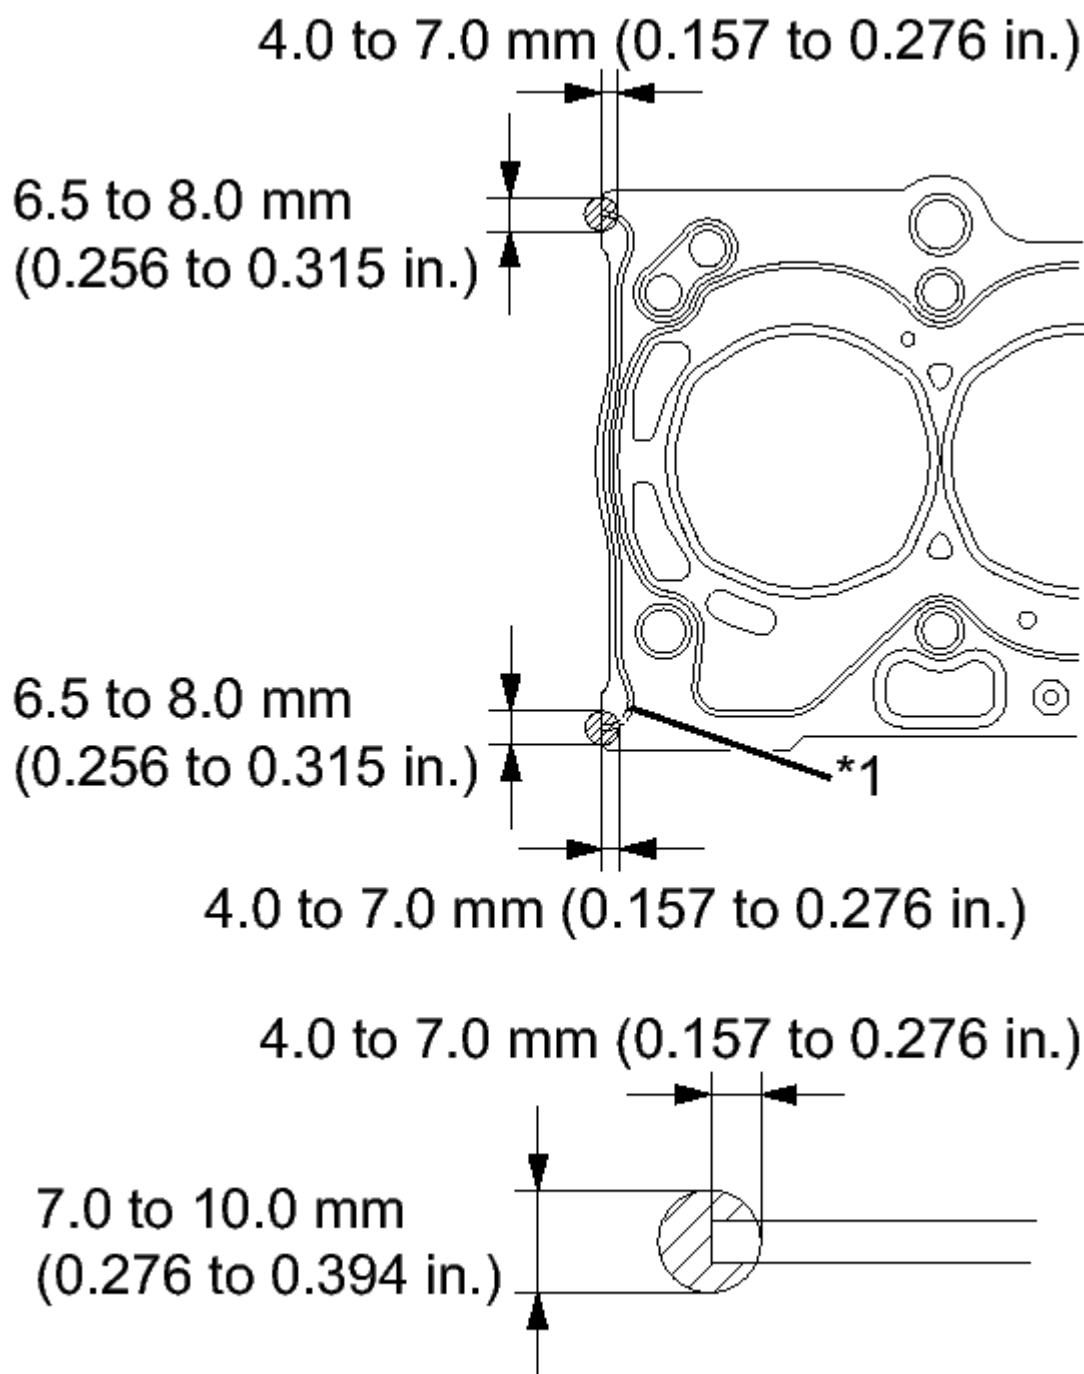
Identifying Cylinder Head Gasket Seal Packing Application Areas
